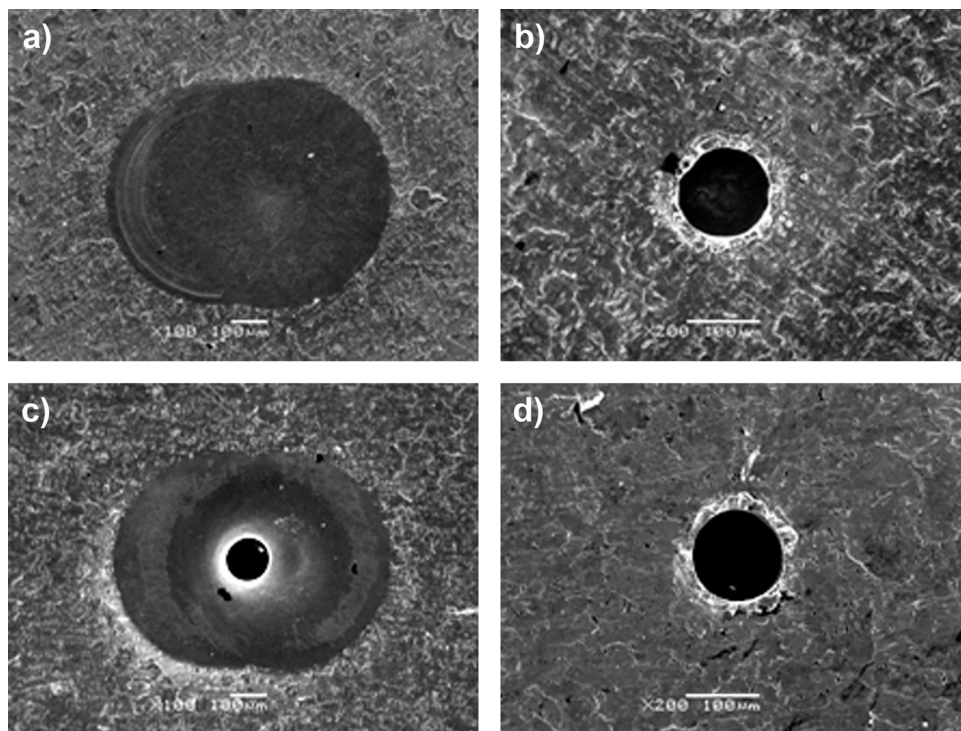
Top (a) and bottom (b) surfaces of welds made with 0.5kW peak power and 2 ms pulse without electrolyte. Top (c) and bottom (d) of welds made with electrolyte.
